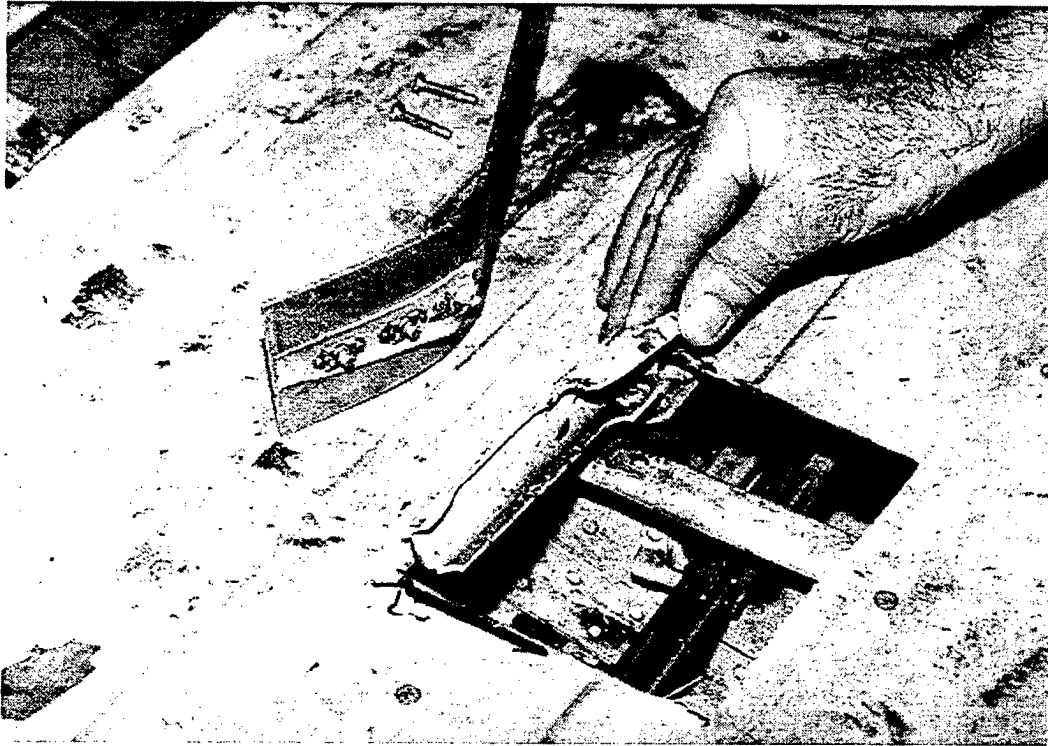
POSTTEST AUXILIARY FUEL TANK LOWER LEFT BRACKET
